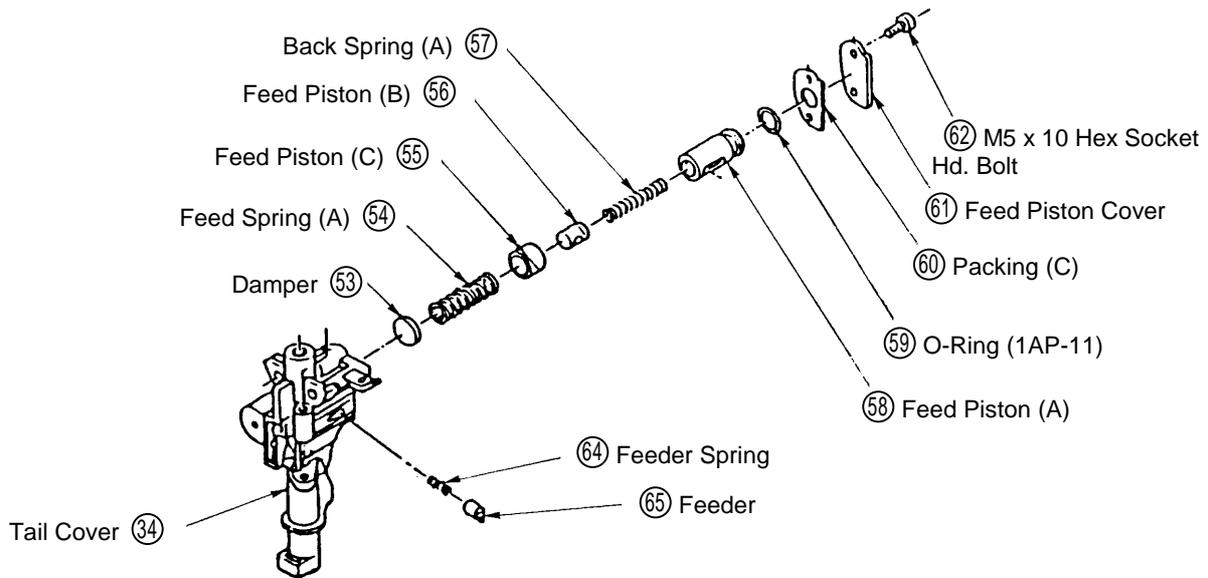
Disassembly and Reassembly of Feed Piston and Related Parts
